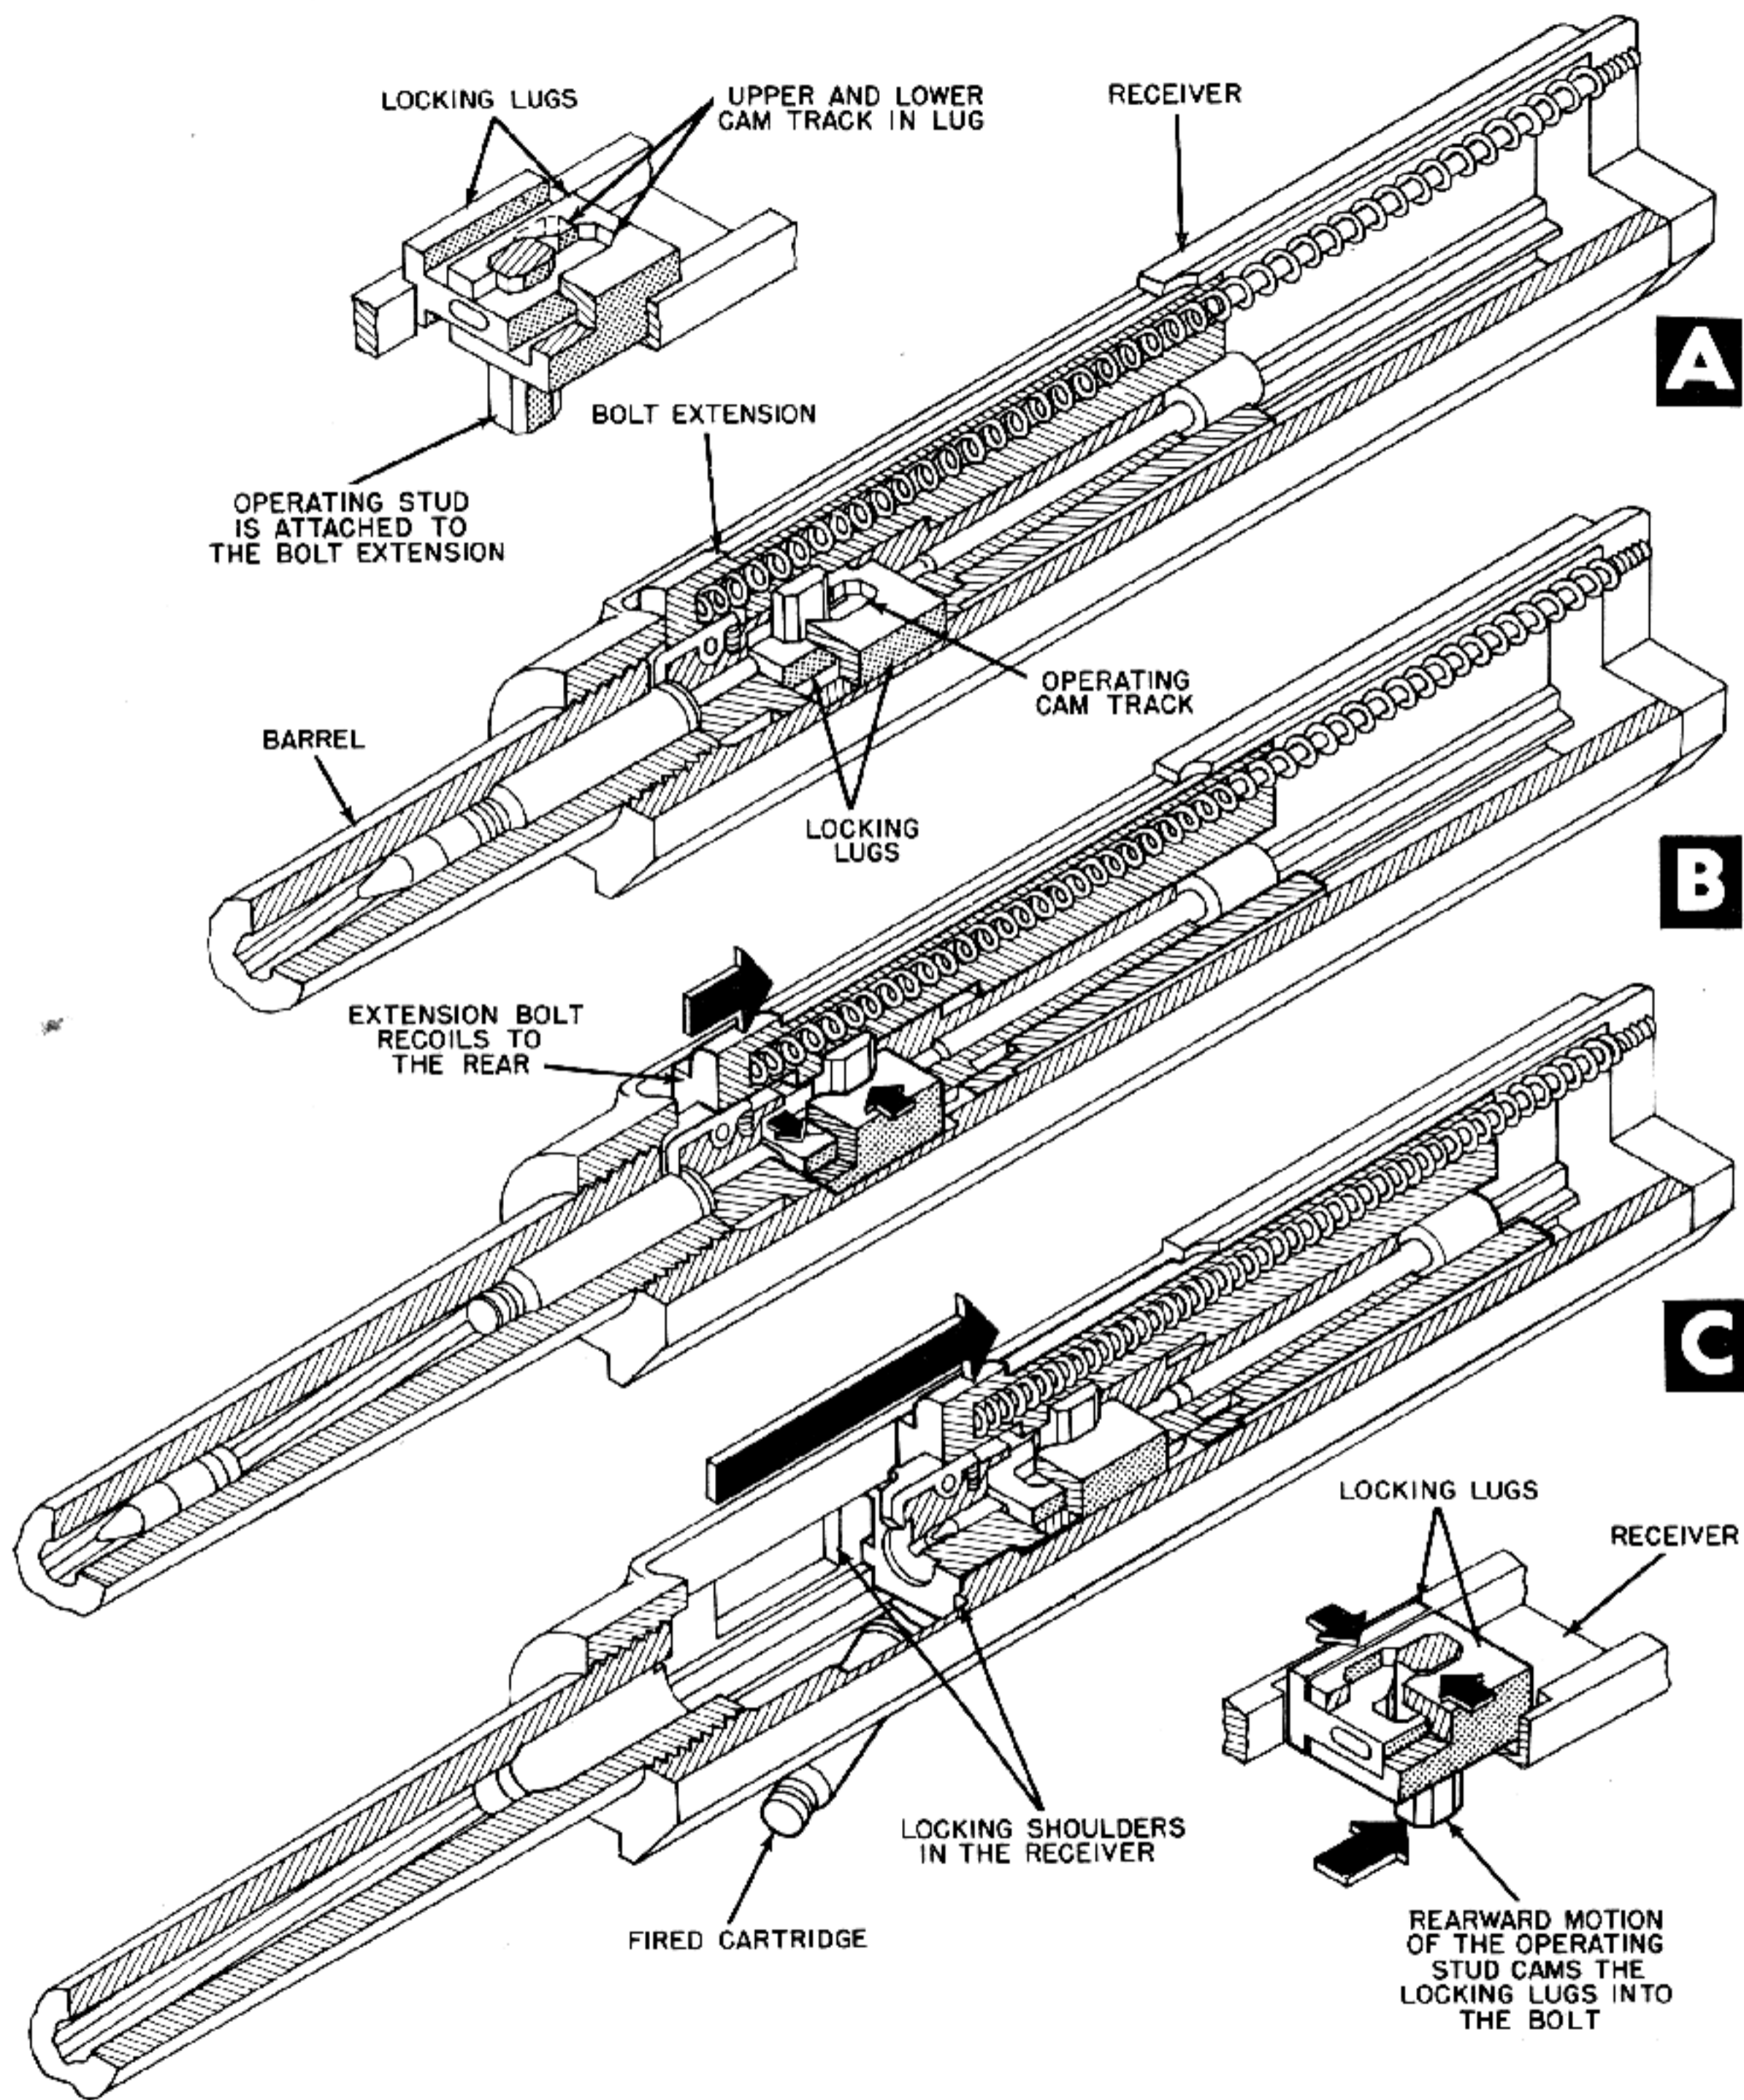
Recoiling Bolt Extension Cams Locking Lugs Free of Receiver.
